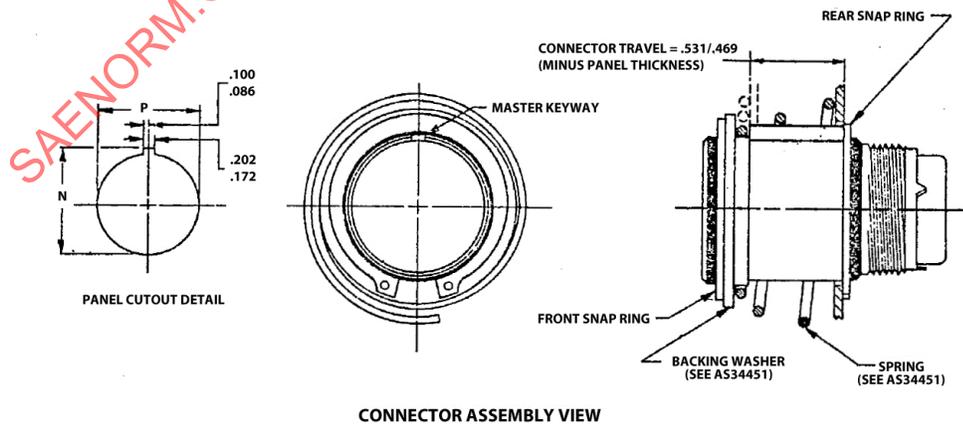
CONNECTOR ASSEMBLY DETAILS
